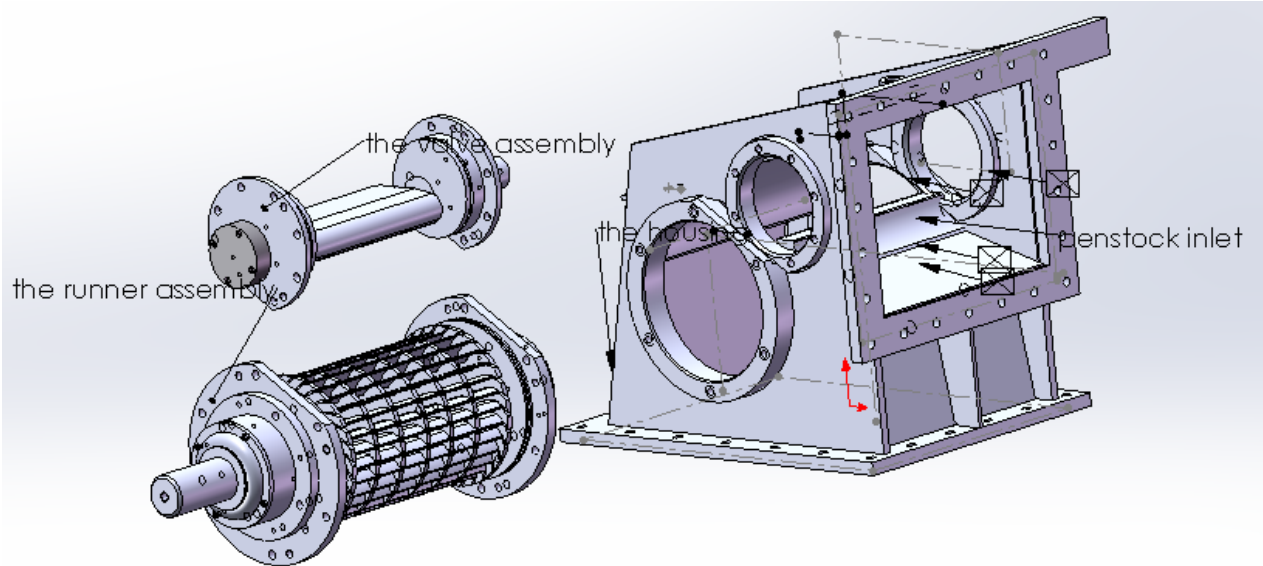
3D exploded drawing of the model of the cross flow turbine used for simulation purpose
